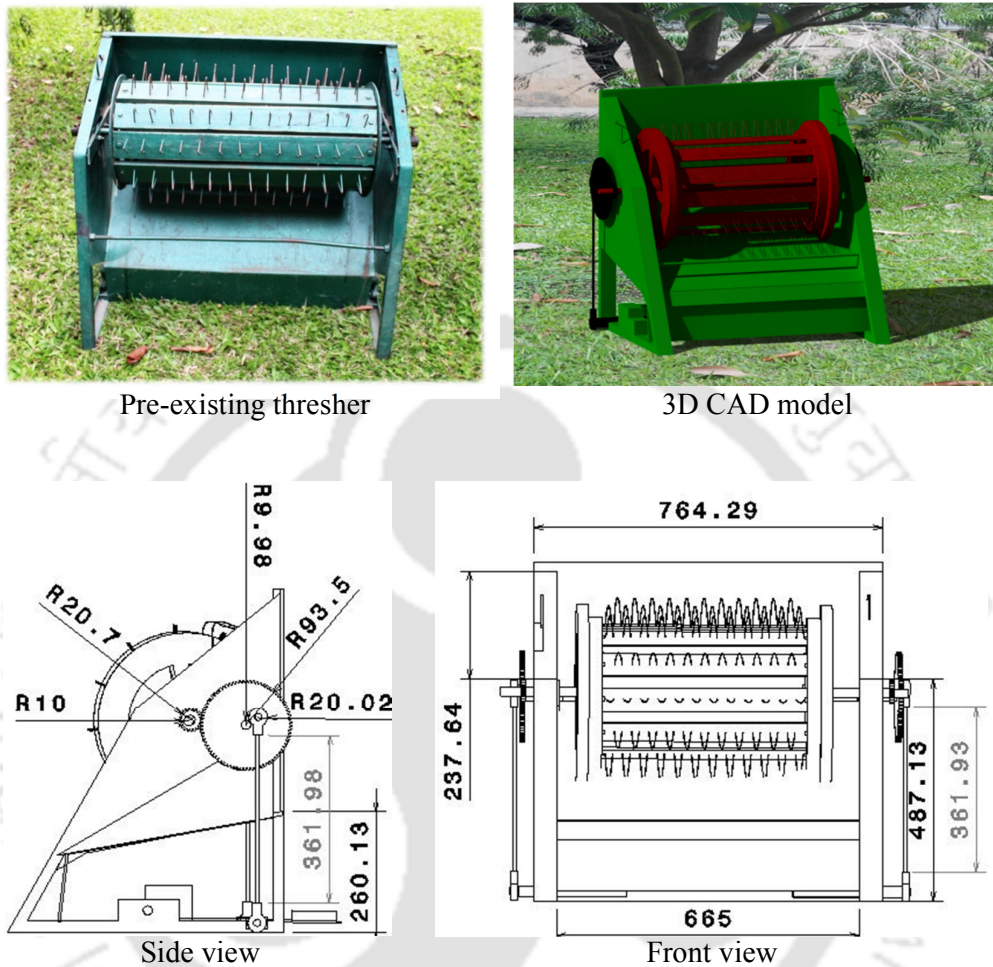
pre-existing thresher and its 3D CAD model with detailed dimensions (All dimensions are in mm; Scale 1:10)
